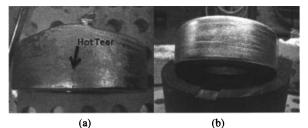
Ring mould test of Al 2014 wrought alloy; (a) conventional casting process and (b) CDS process [6].
